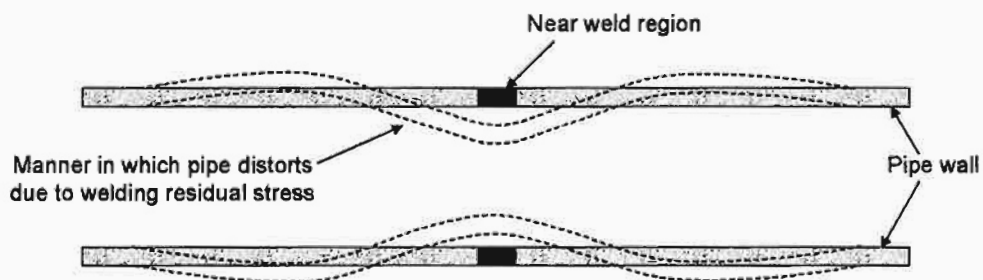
The manner in which a tube distorts to relieve residual stresses due to circumferential welding. Masubuchi (1980)
